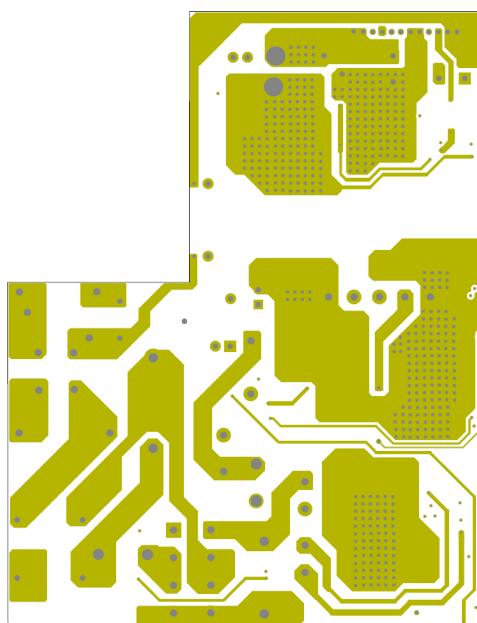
Main Board Printed Circuit Layout, Inner 1.
